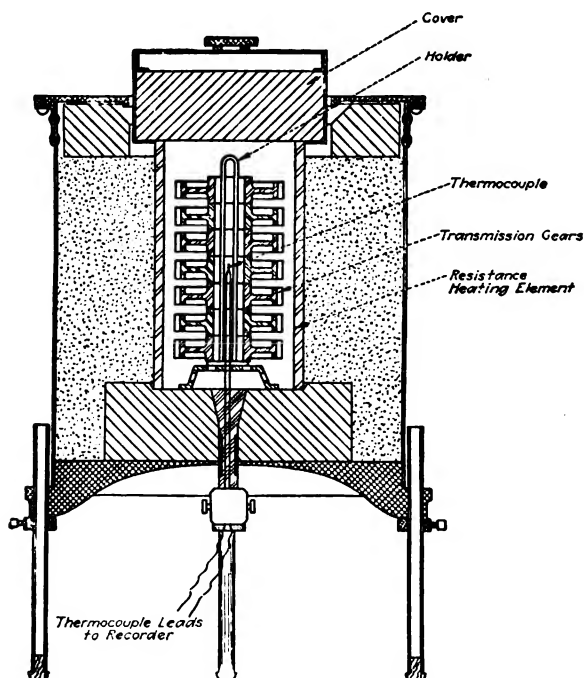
Section through the Packard electric gear treating furnaces showing construction
